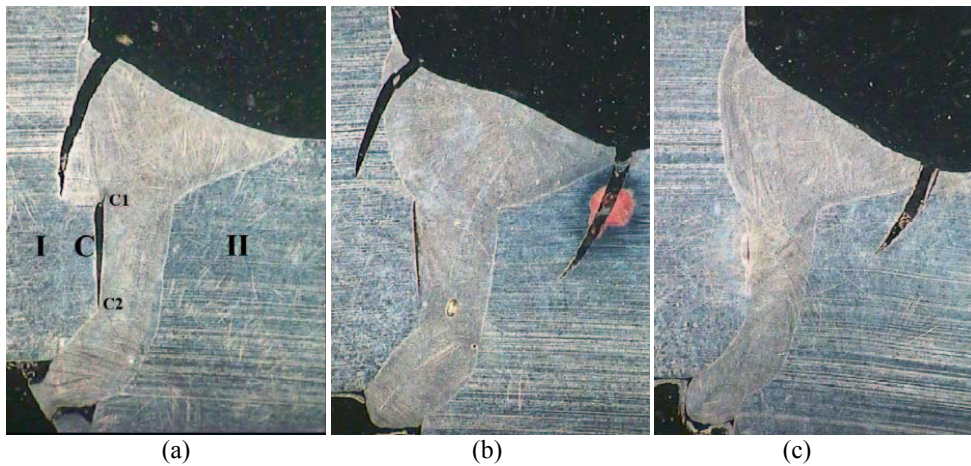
shows a typical cracked weld top surface that failed at the lower toe. Figure 7 shows fatigue crack propagation from the lower and upper toes of welds with LOF defects. It is interesting to note that LOF opens and becomes more visible under load, but does not propagate as a crack.
